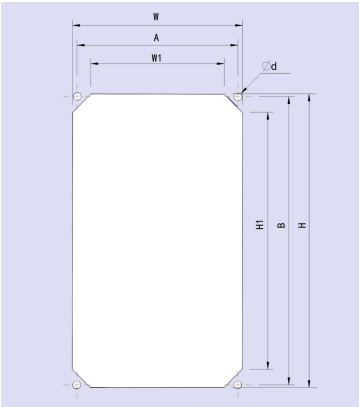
Dimension drawing of VFD 7.5kW Figure 2-9. Dimension drawing of VFD 18-55kW
